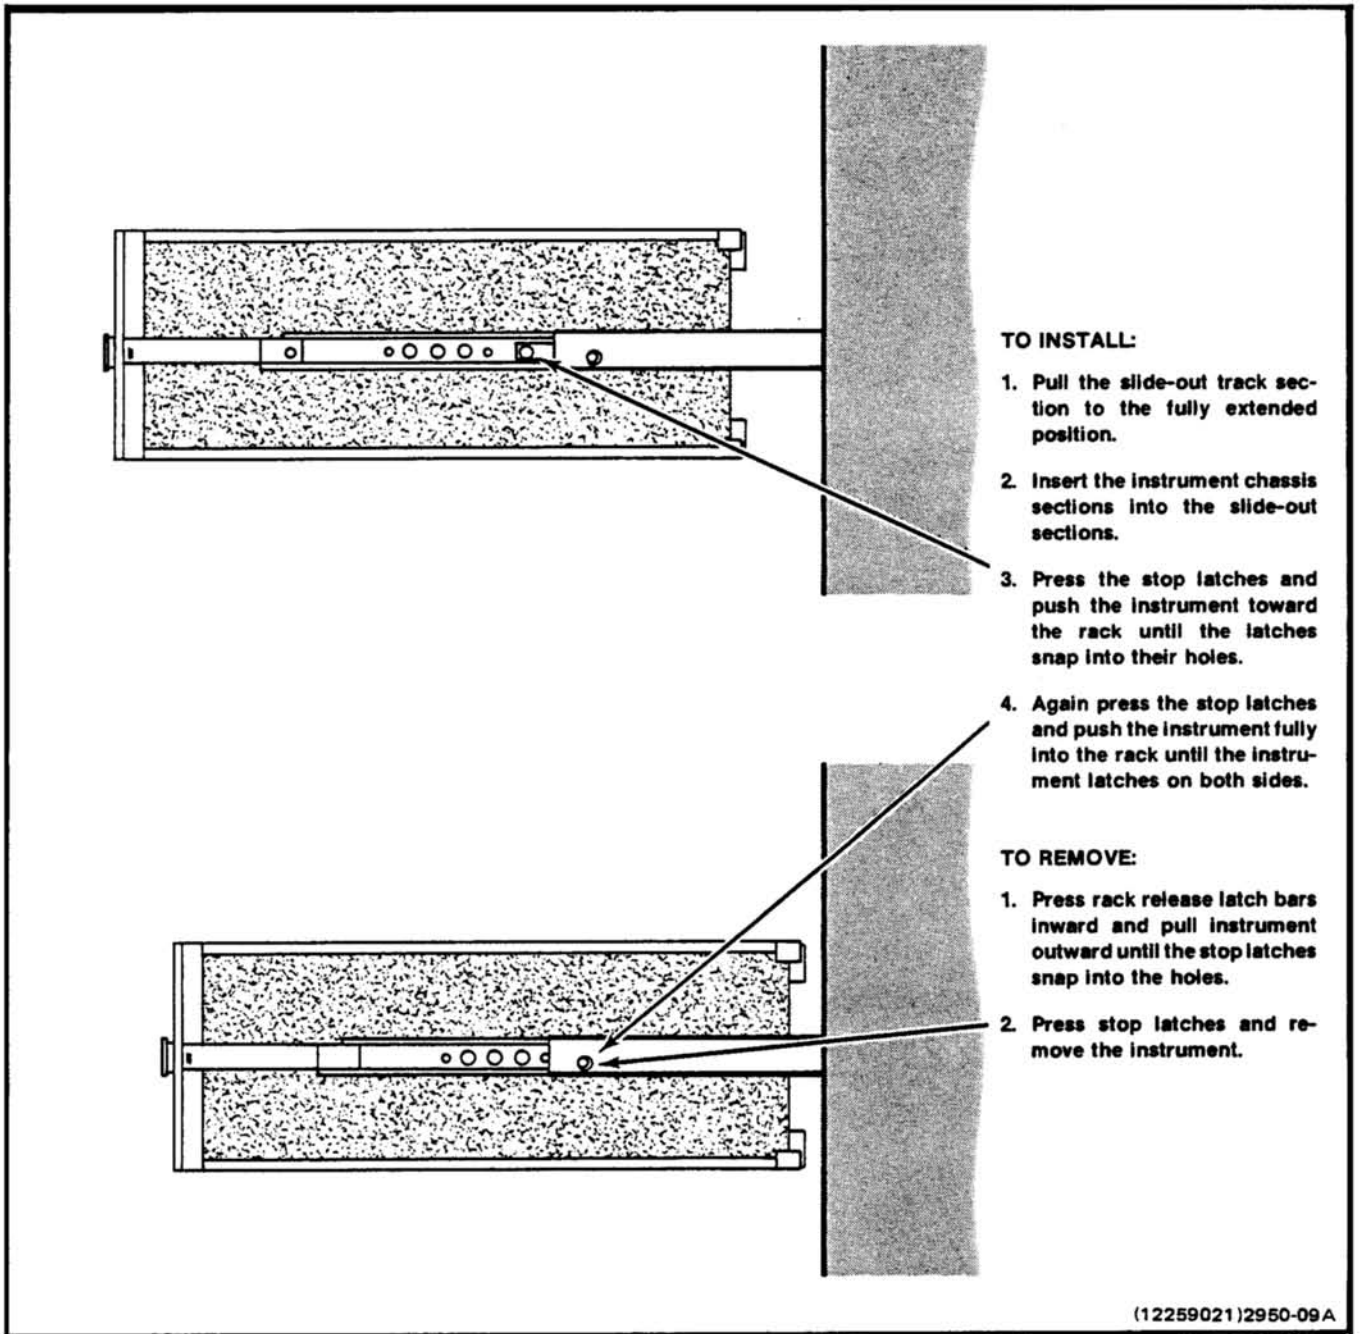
Removing and installing TM 5006 in rack slides.
